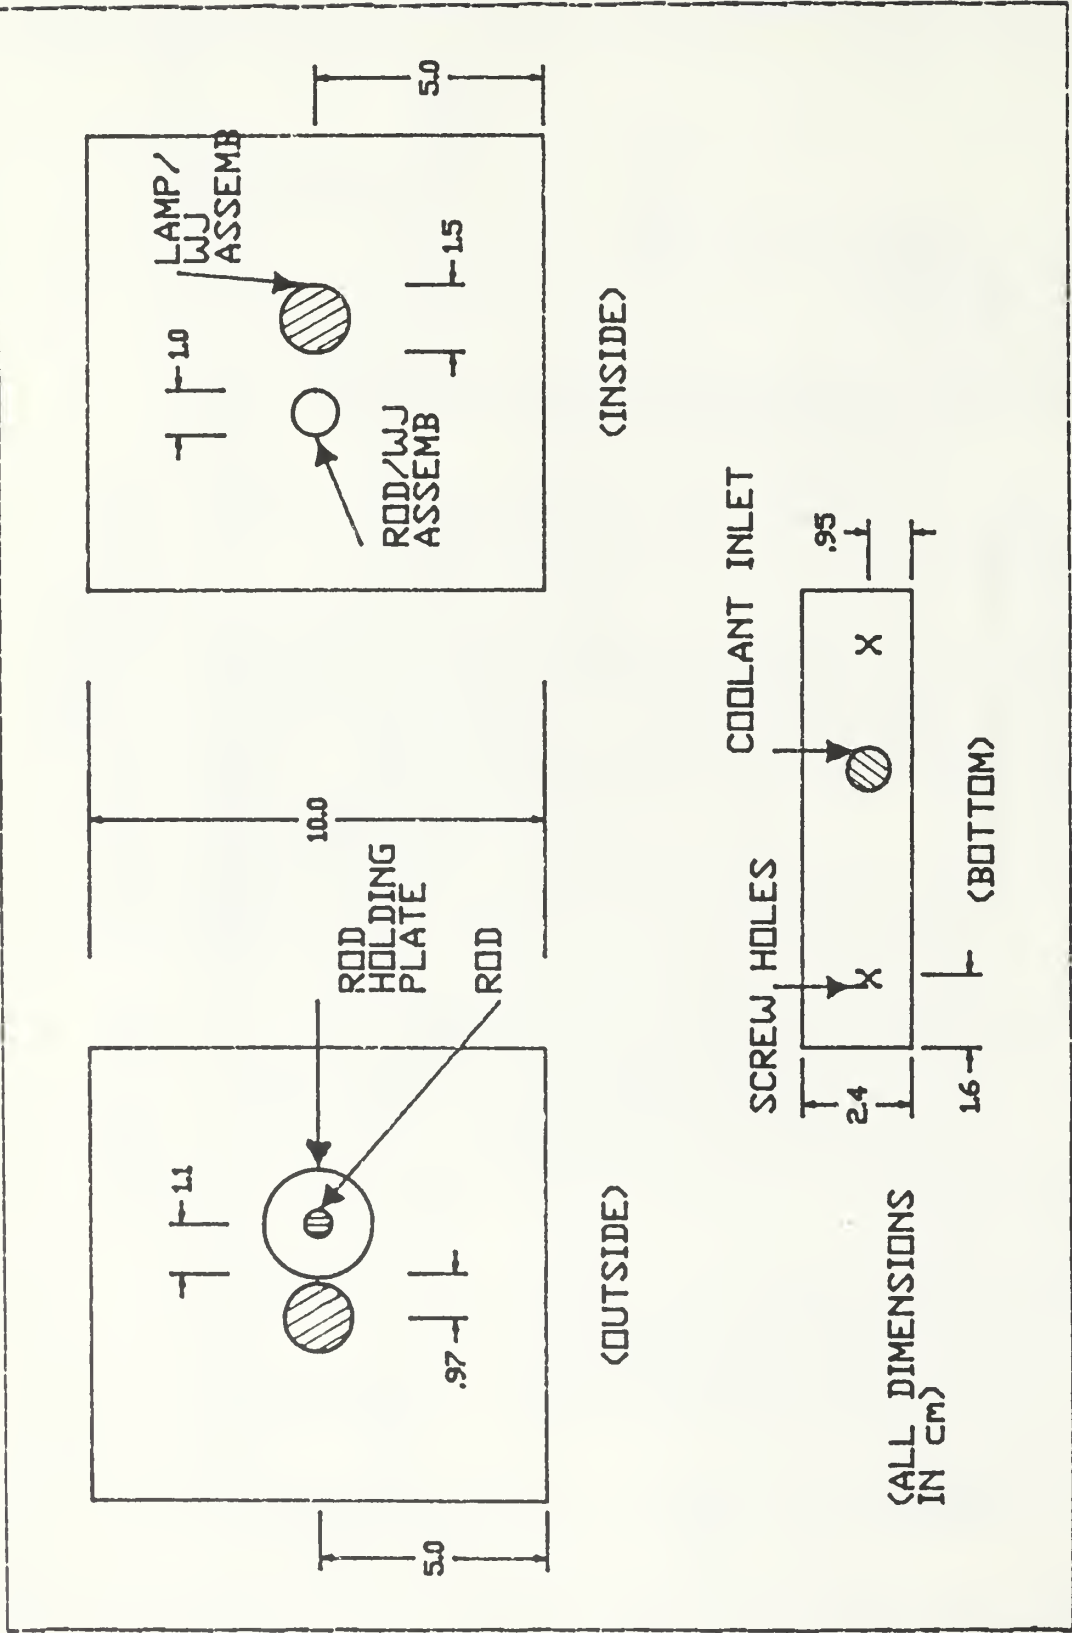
End Plate "A" (End Plate "G" is the Mirror Image)
